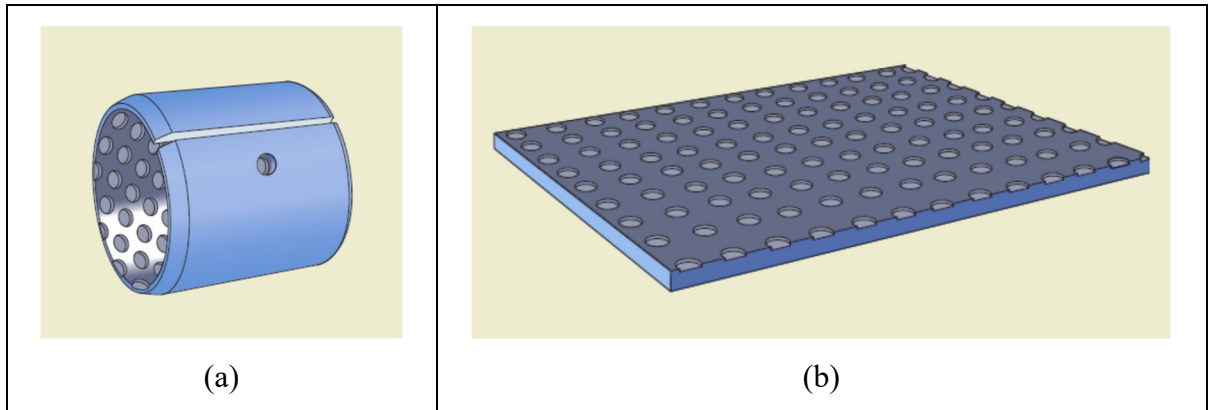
POM Composite bearings; a) Straight cylindrical bushing with a lubrication hole, b) sliding plates
